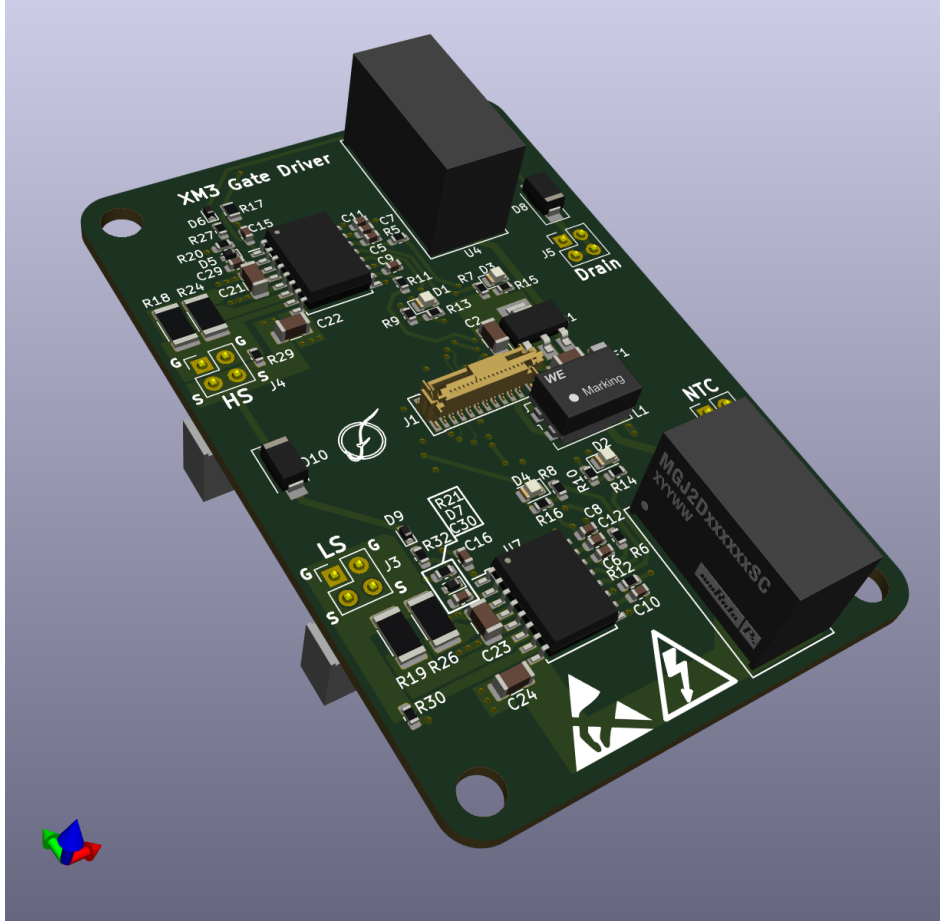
3D Render of Gate Driver PCB as Generated in KiCad
